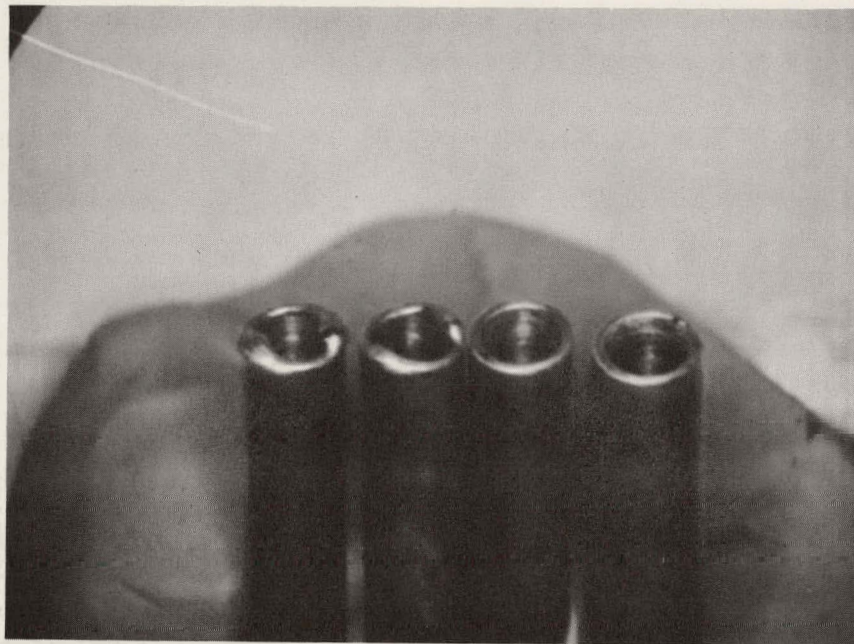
Cup Type End Cap Welds... Left to Right:
